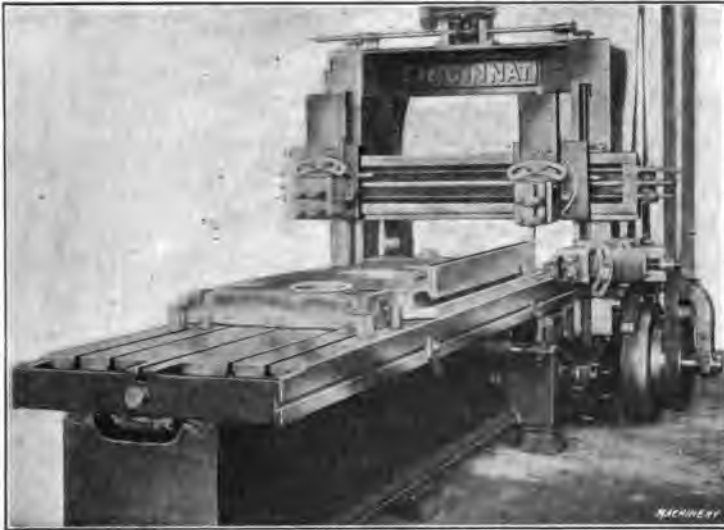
Planing Top Edge and Side of Casting—Illustrating use of Side-head
